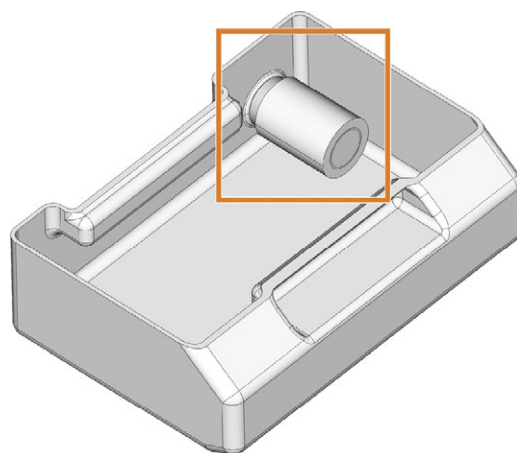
COOLING LIQUID FILTER IN THE TANK
